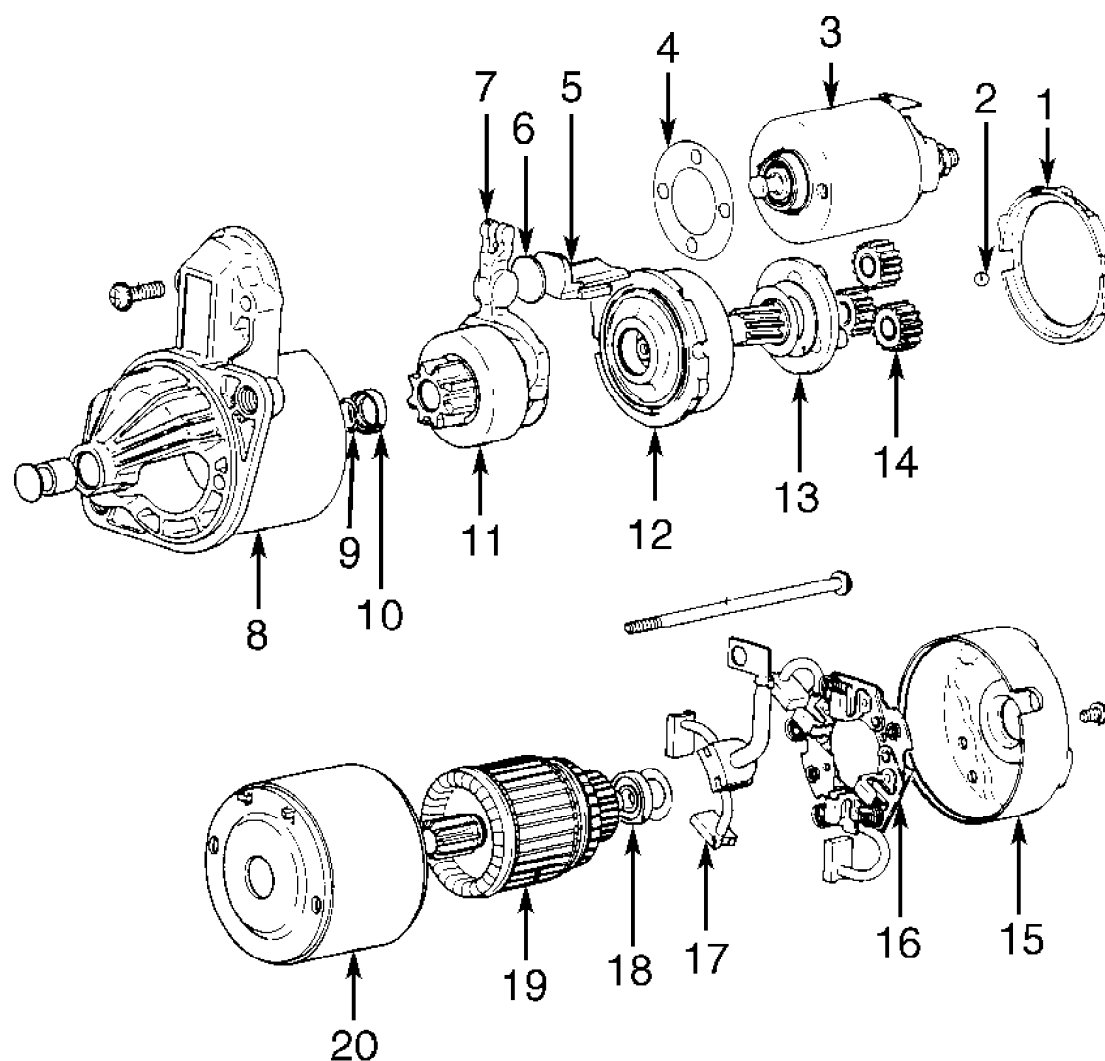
Exploded View Of Direct Drive Starter (Typical)
